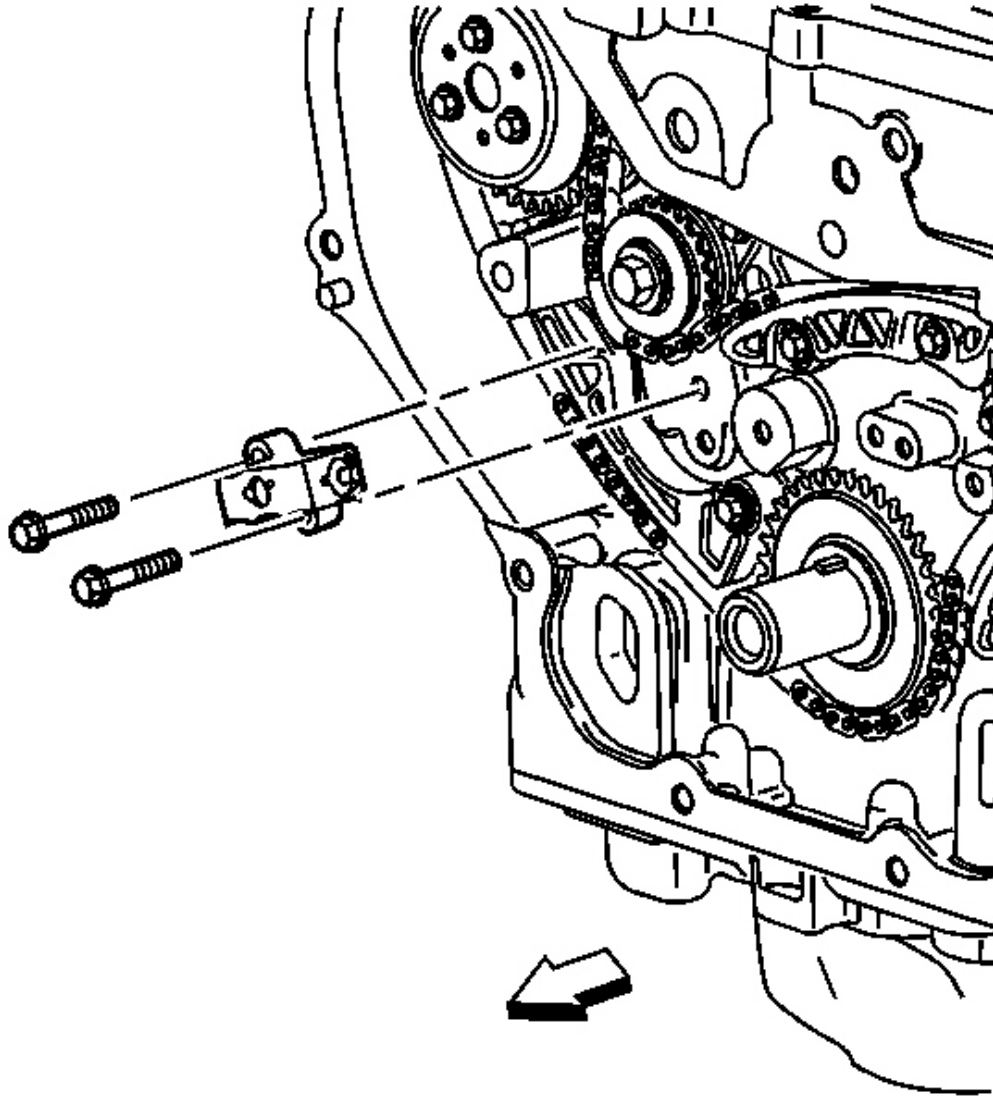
Identifying Balance Shaft Drive Chain Tensioner
